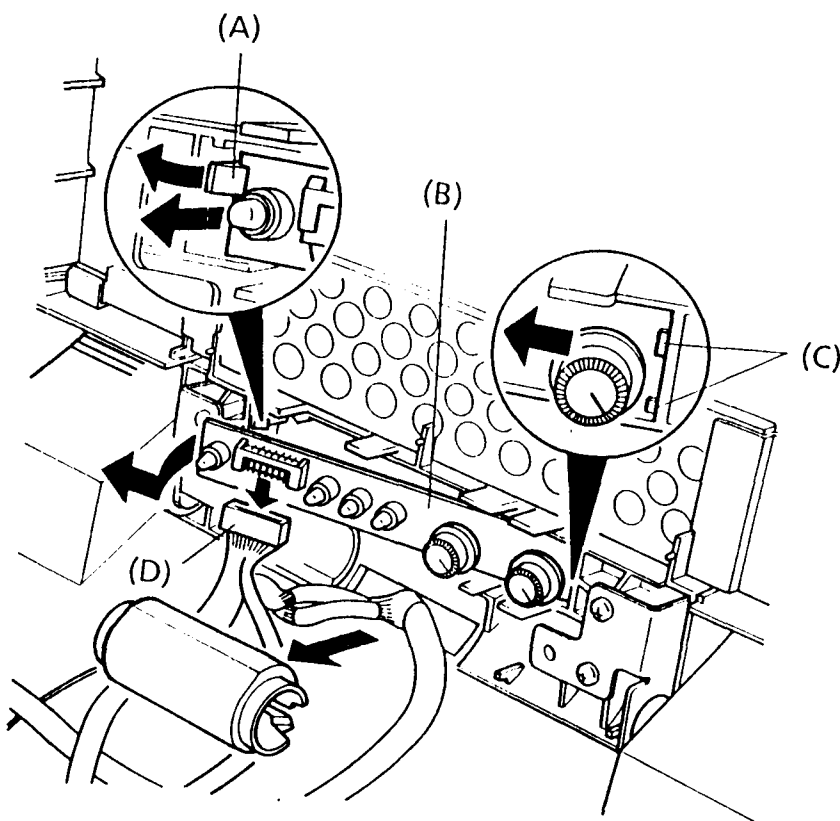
Removing the Volume Board and the Cable Guide
